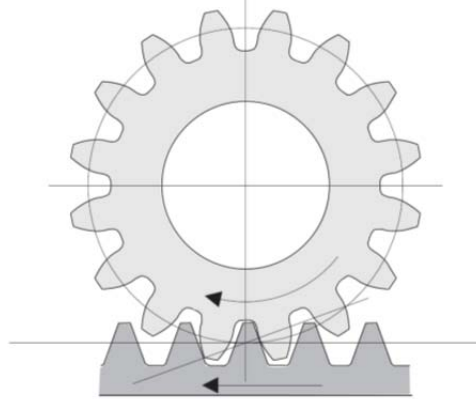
Sketch of a rack (lower straight gear) and pinion (upper gear)
